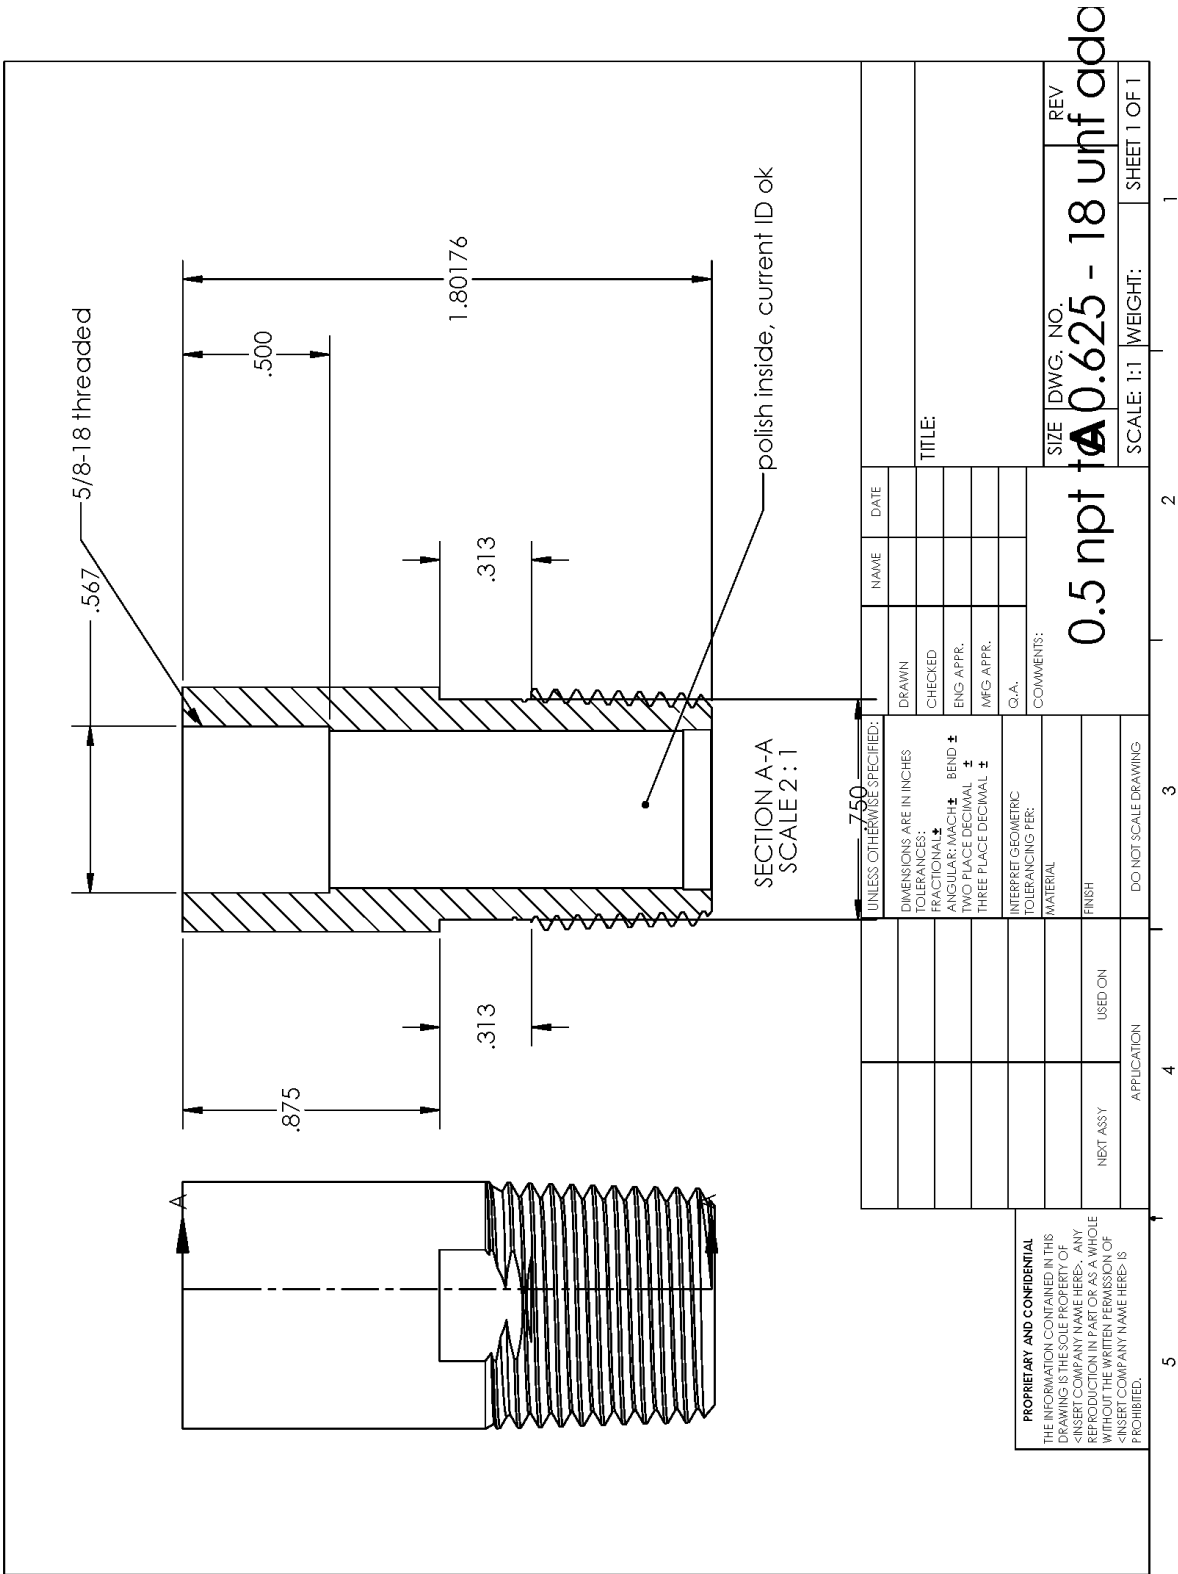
NPT to 5/8-18 thread adapter for mounting threaded catcher tips.
